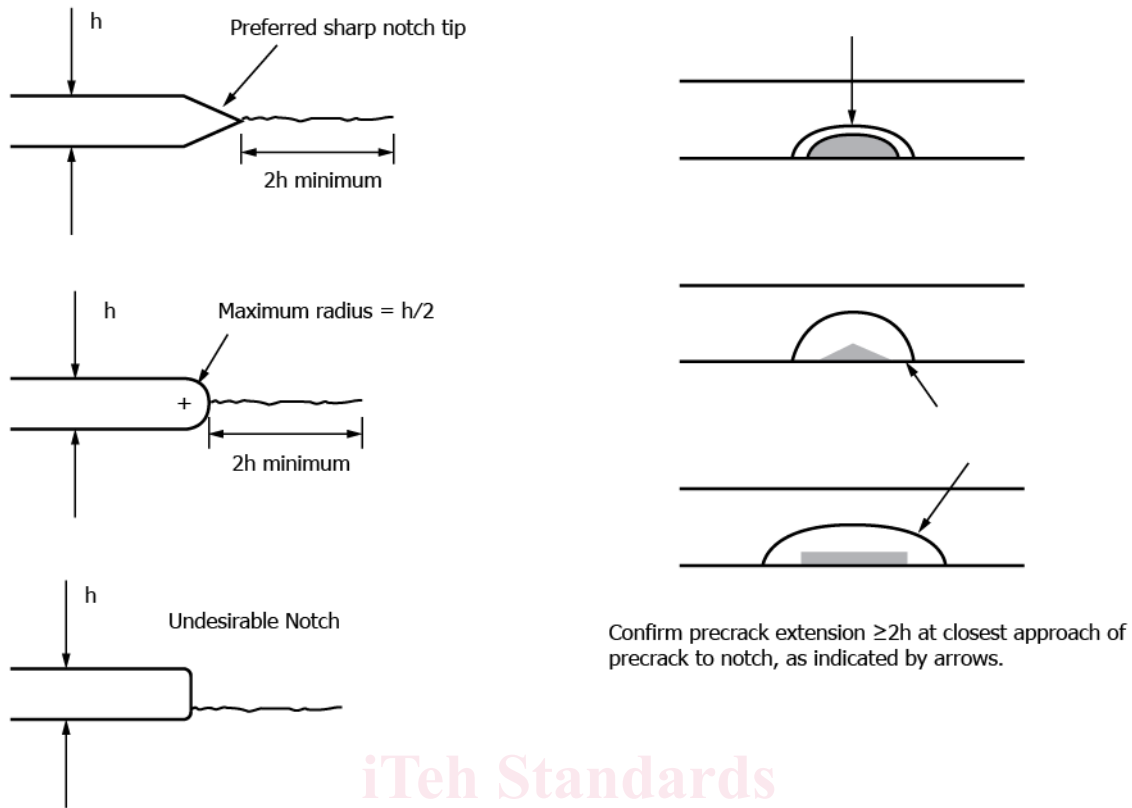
Fatigue Crack Starter Notch Configuration
